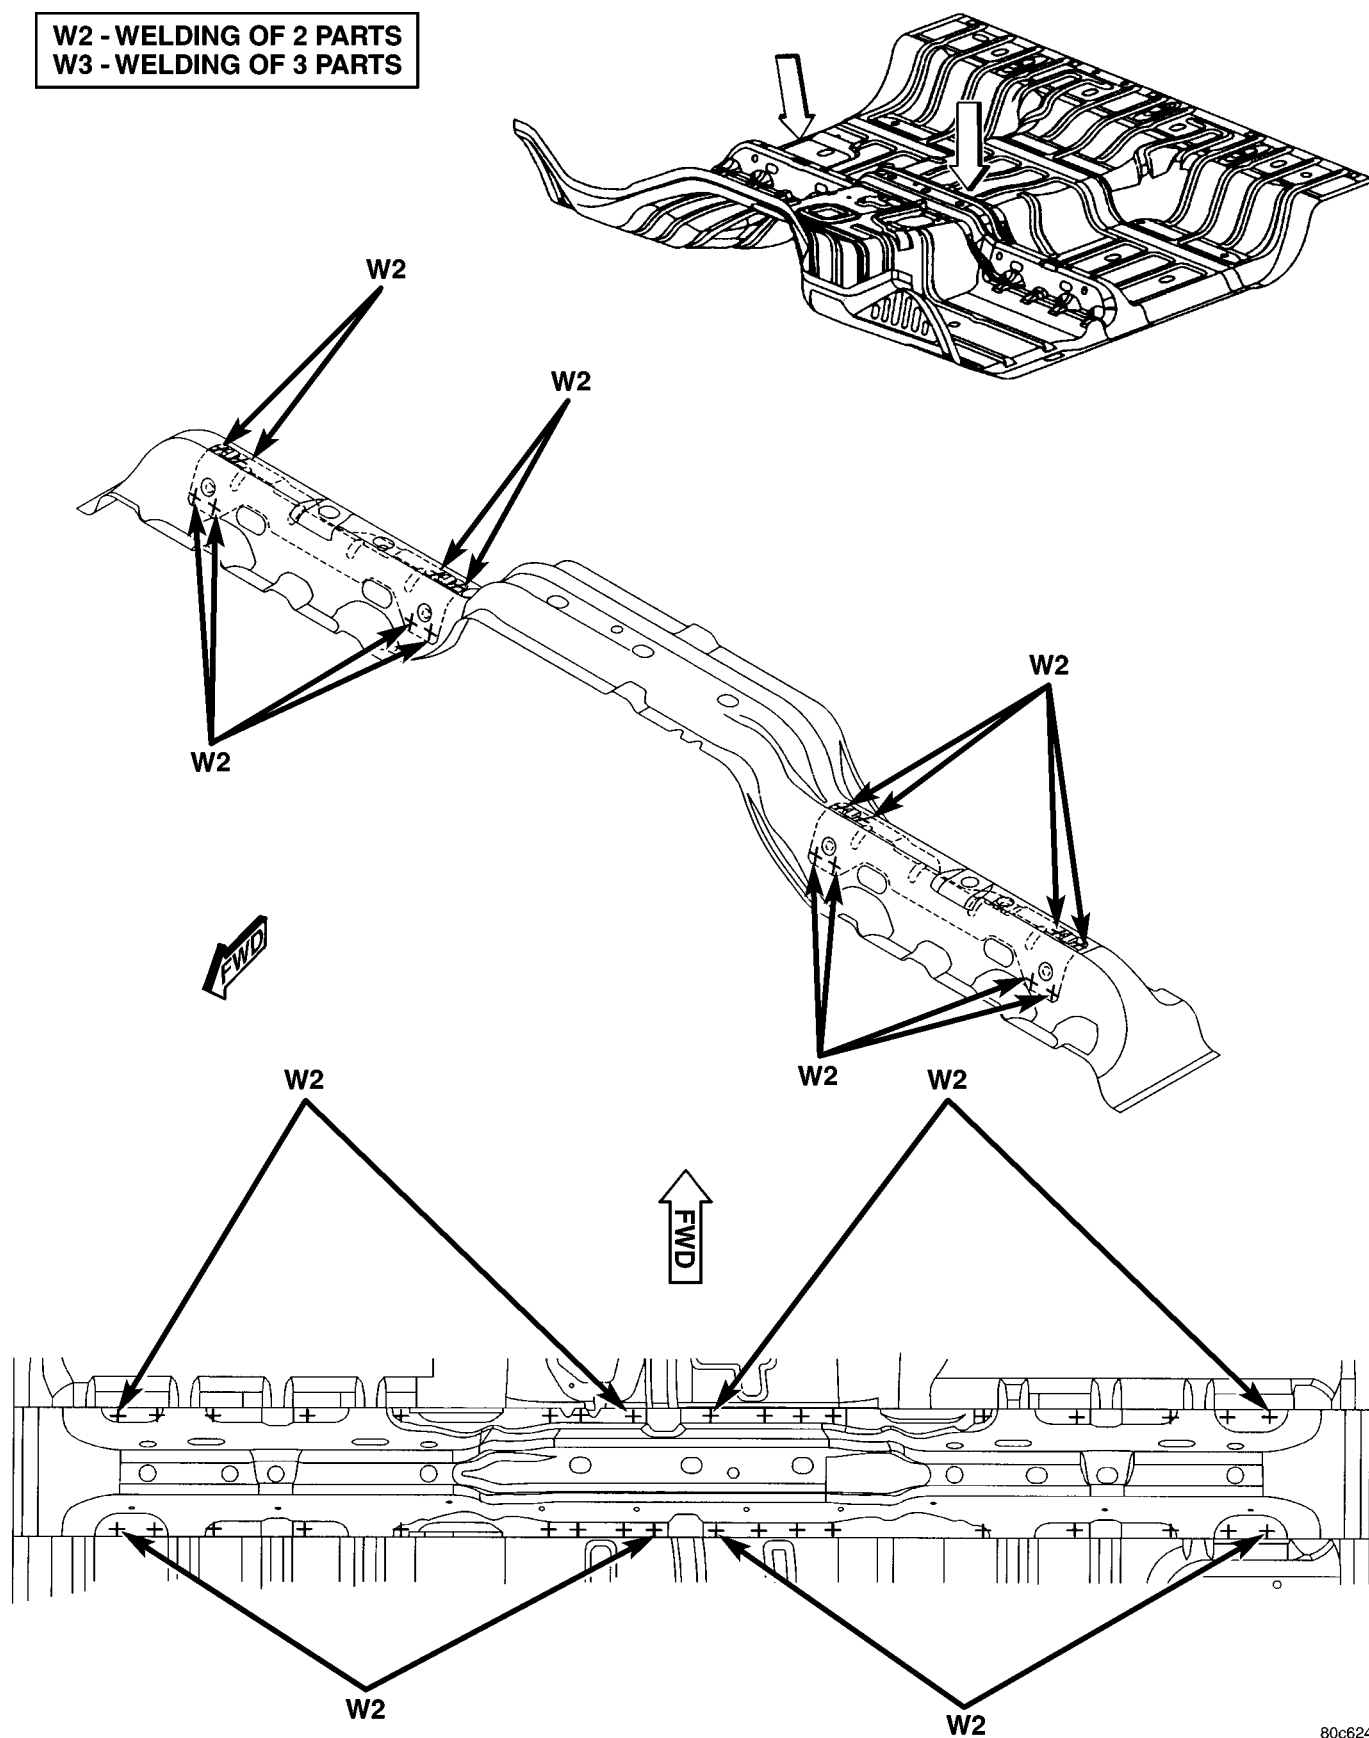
SEAT MOUNTING FRONT BRACKETS - STANDARD CAB
